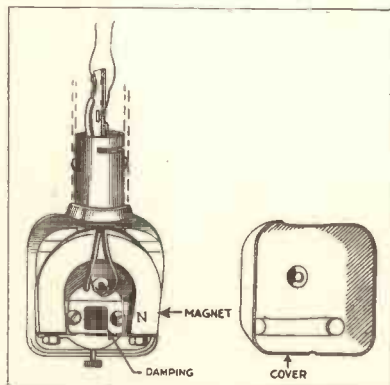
HOW THE PICK-UP HEAD IS REMOVED FOR EXAMINATION.
